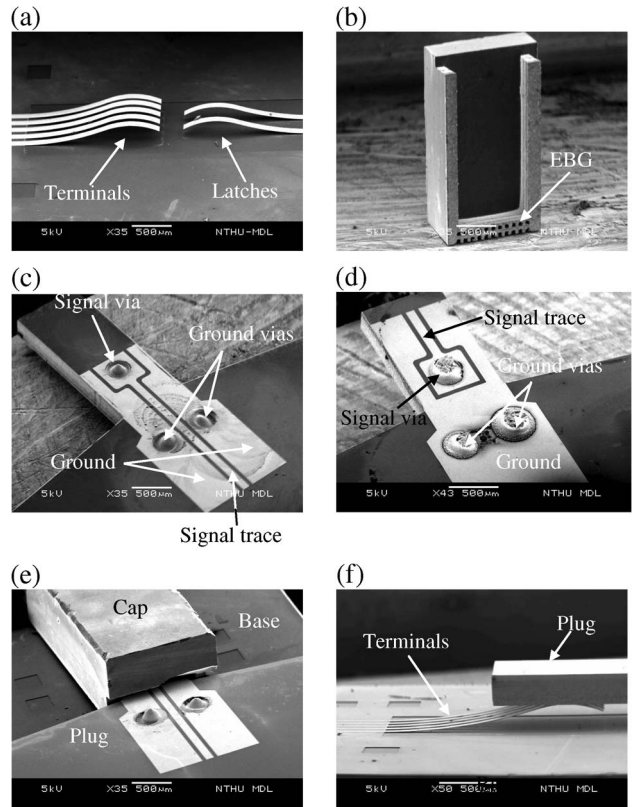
SEM photomicrographs of the completed ZIF μ -connector components. (a) Terminals and latches. (b) Cap. (c) Top view of the plug. (d) Bottom view of the plug. (e) Assembly with the cap. (f) Assembly without the cap.
